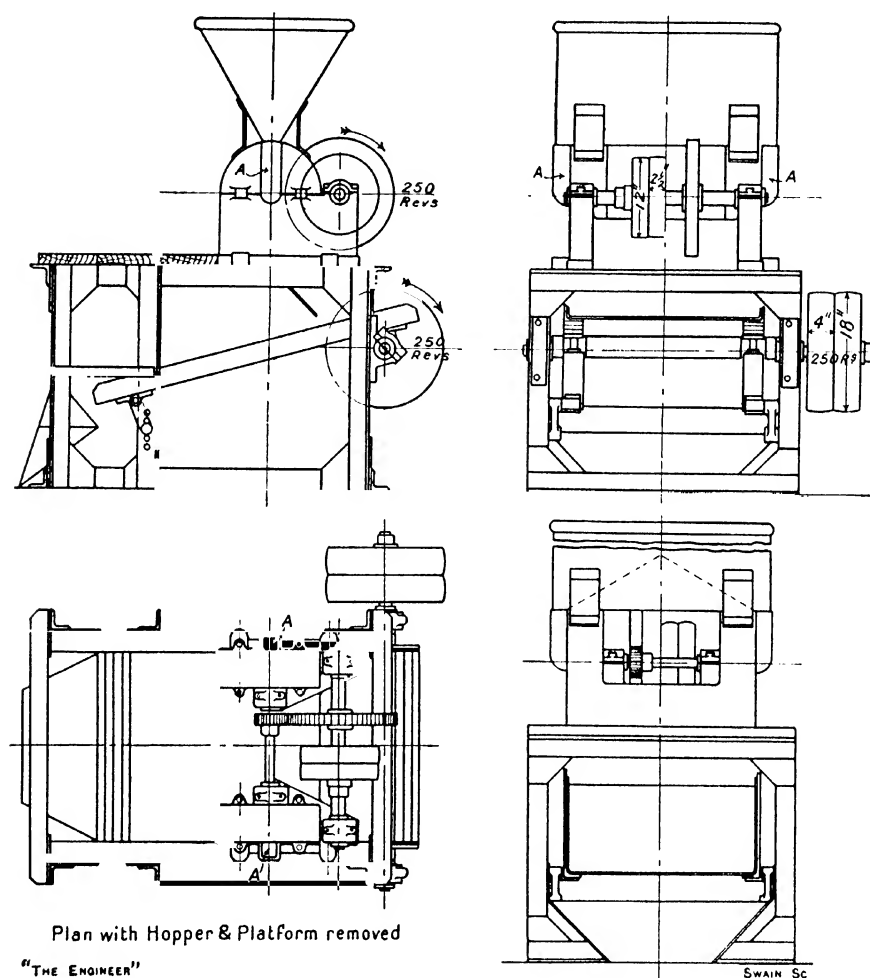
Palm Nut-cracking and Separating Machine—Craig.
